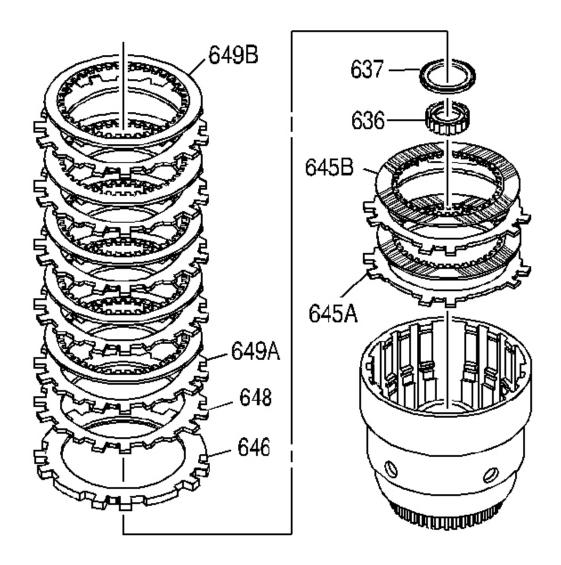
Identifying Forward Clutch Selective Backing Plate & Retainer Ring Courtesy of GENERAL MOTORS CORP.
